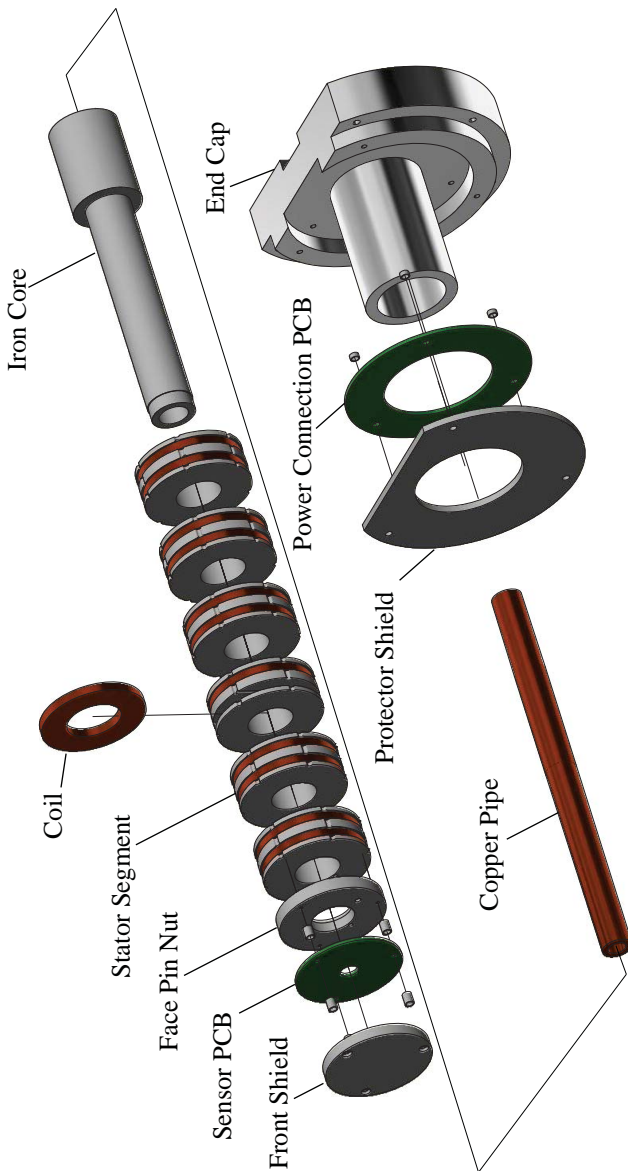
Exploded view of the inner linear stator assembly with the sensor PCB and the power connection PCB.
